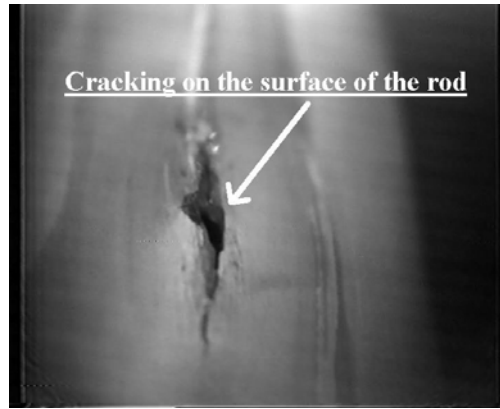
Photo of the damaged K5 control rod. FIGURE 2. Photo of the crack on the surface of the damaged K5 control rod
